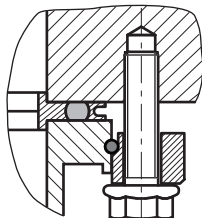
Flange connection ISO-K to ISO-F, hexagon head screw and tapped hole
